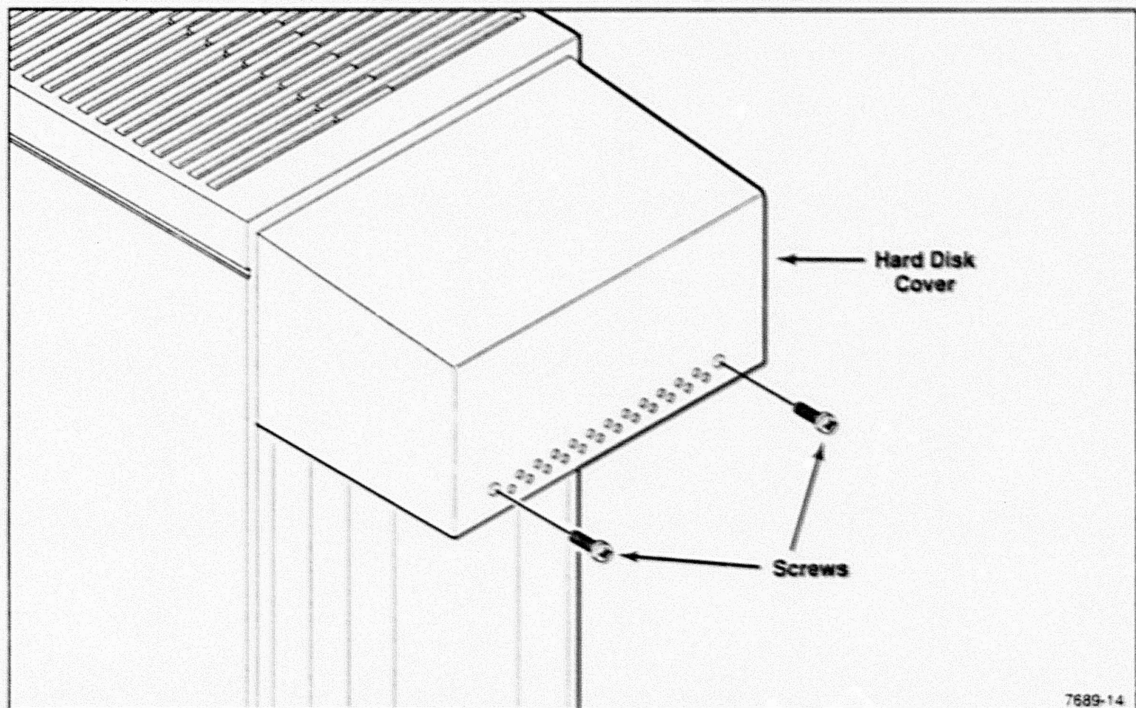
Mass Storage Subassembly Rear Mounting Screws.
